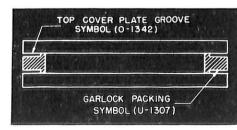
Cross-sectional view showing Garlock Packing Ring properly installed with wide dimension against bottom of groove in top cover plate.
